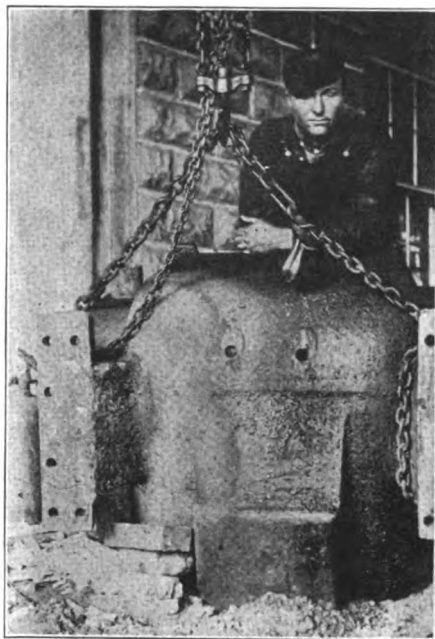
THE WELDED CRANK CASE—GOOD AS NEW
